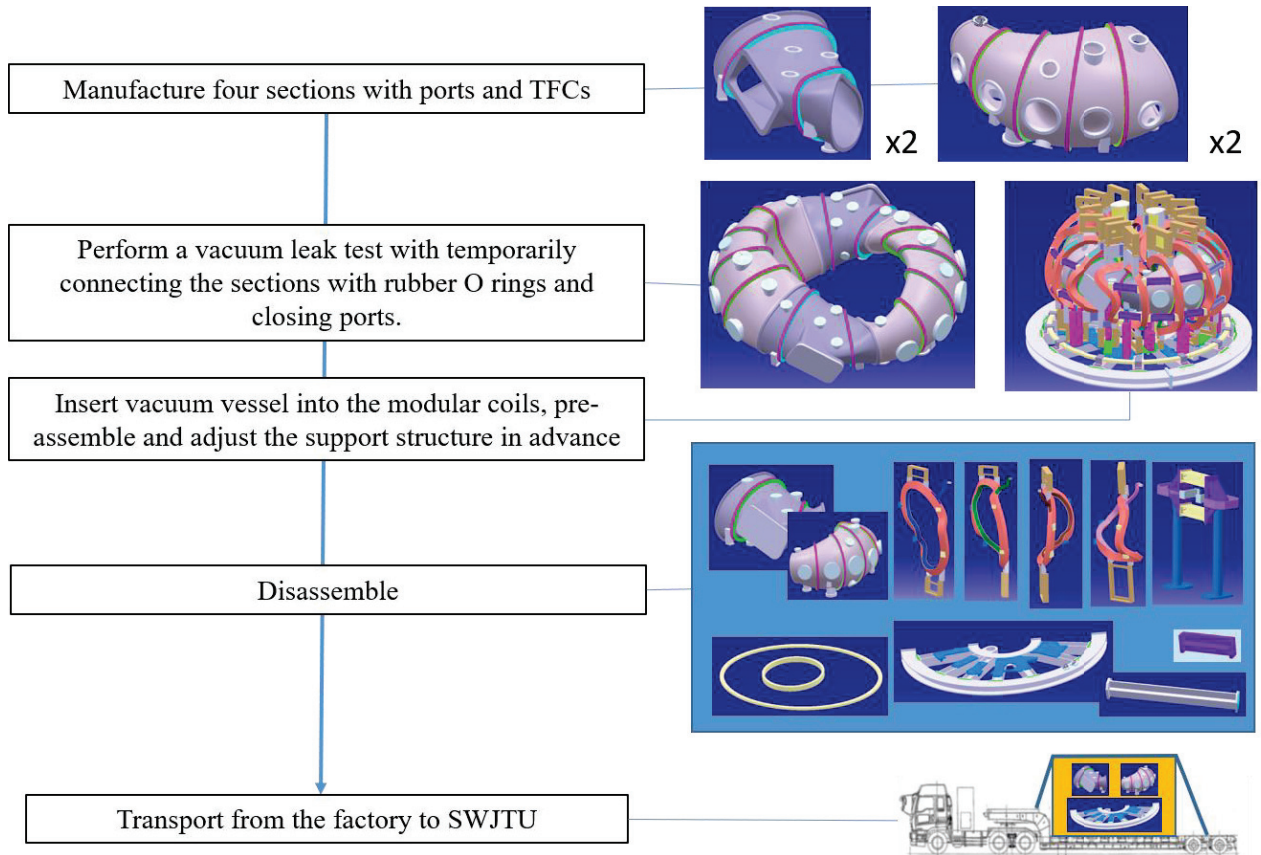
Pre-assembly process of vacuum vessel in a factory.
